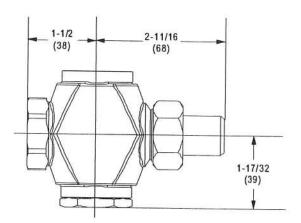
1/2 in. Normally Closed Union Globe VG7000 Series Bronze Control Valve Dimensions, in. (mm)
